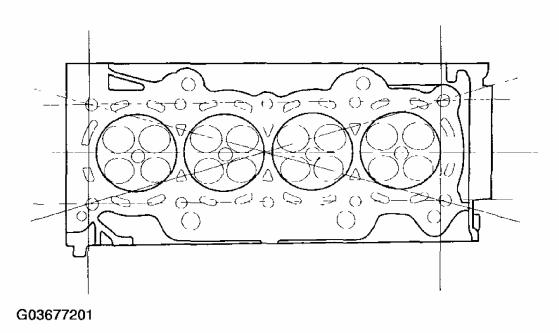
Measuring Cylinder Head Warpage Courtesy of AMERICAN HONDA MOTOR CO., INC.
